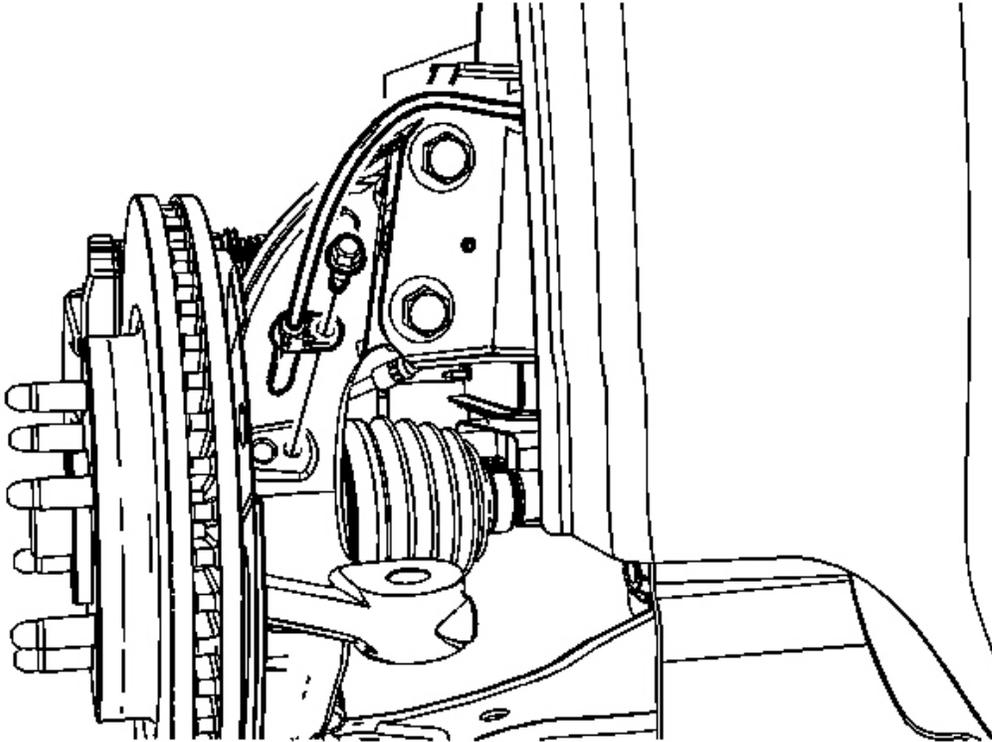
View Of Wheel Speed Sensor Wire, Wire Grommet, Connector & Harness Routing Clips
